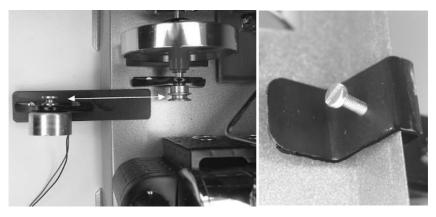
Assembling of the generator: a) both pulley wheels in one line, b) compression fitting, underneath the basic plate
